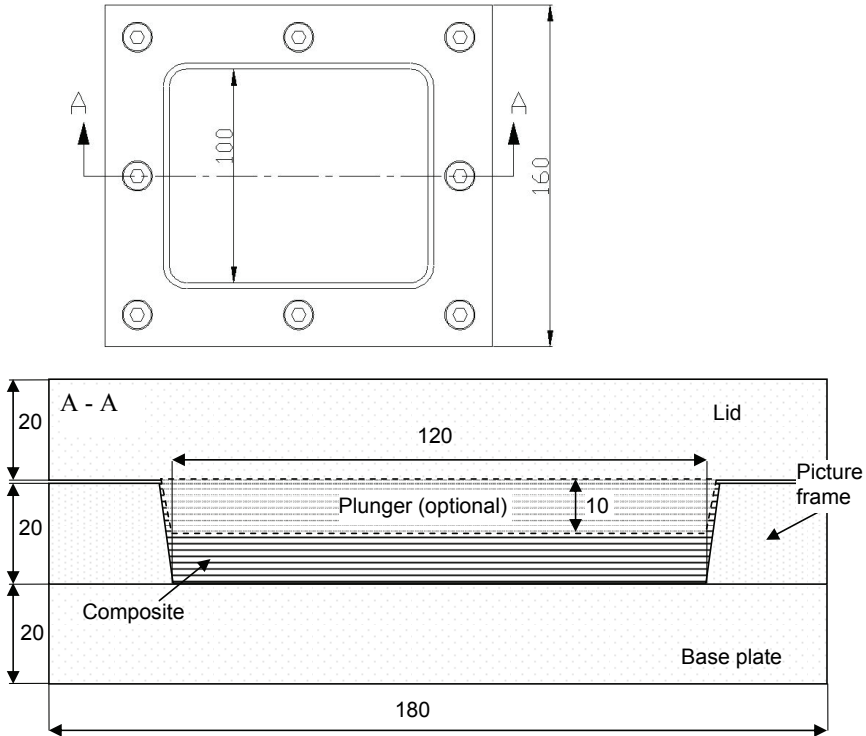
Schematic view of the mould used to manufacture the CF/PPS laminates, dimensions are in millimetres.
